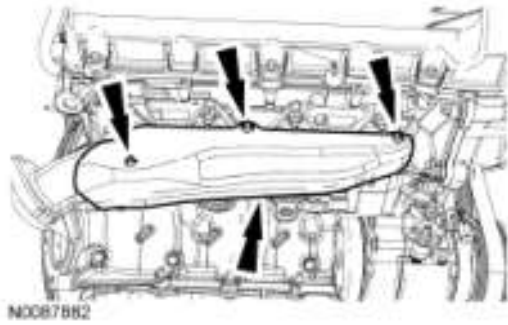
Identifying LH Valve Cover Bolt In Sequence
